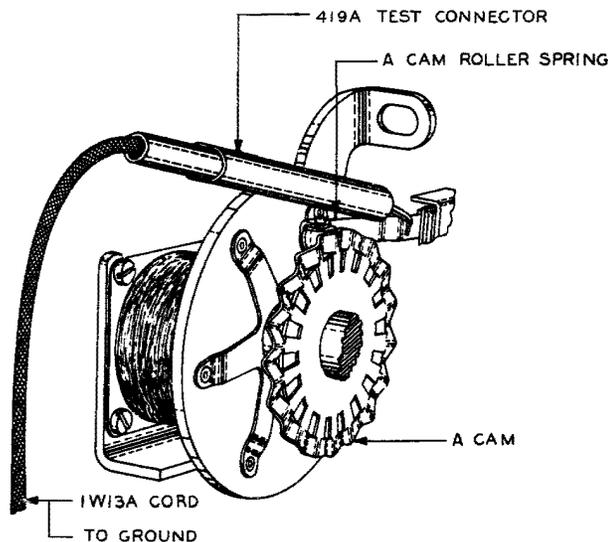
Method of Rotating Sequence Switches Electrically With the 218B A Cam Short-Circuiting Tool
